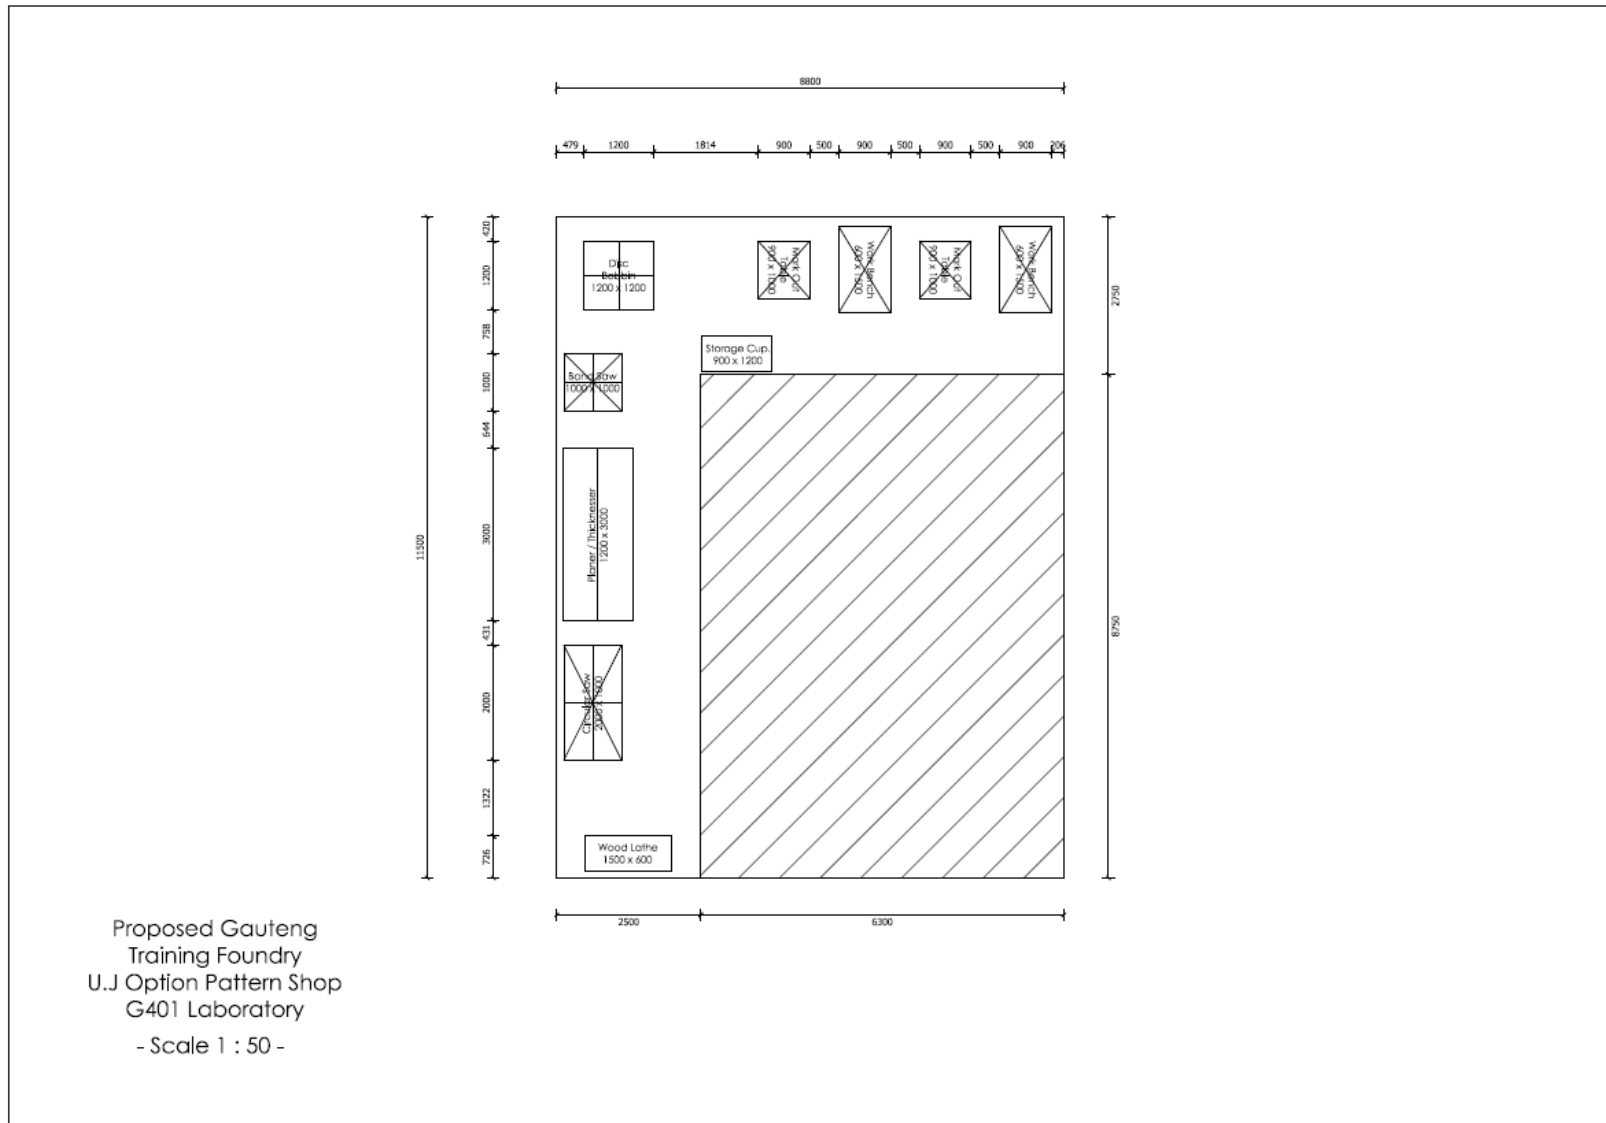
Concept layout for proposed pattern shop at UJ – John Orr Building, Room G401.
